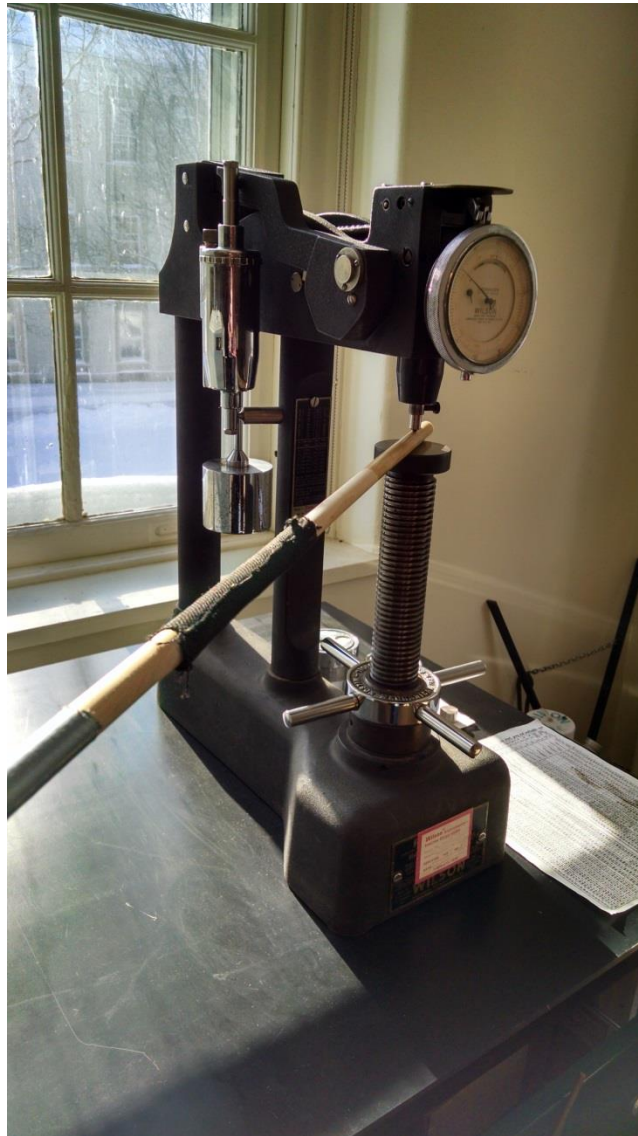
Rockwell C hardness test machine with a mounted dowel rod
